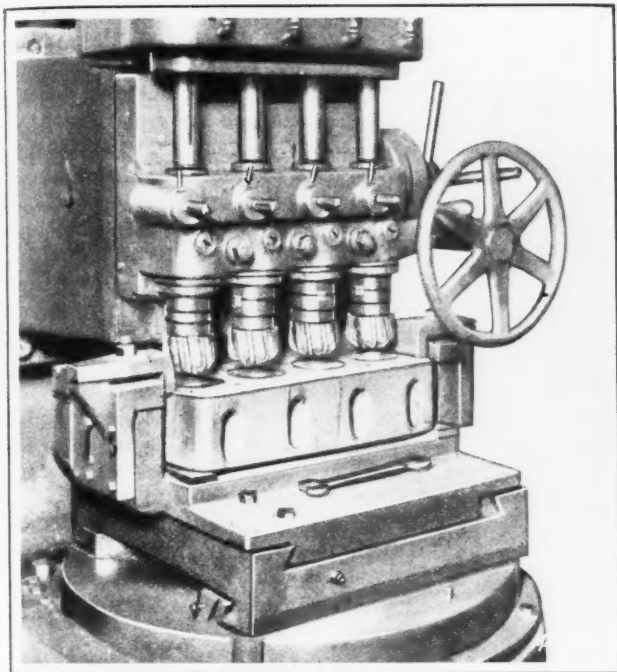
Routing out the Combustion Chambers in the Top of the Cylinder Head
